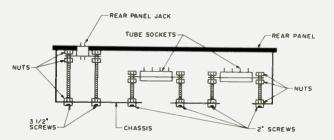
Mounting arrangement for tube sockets and parts used in the amplifier.
